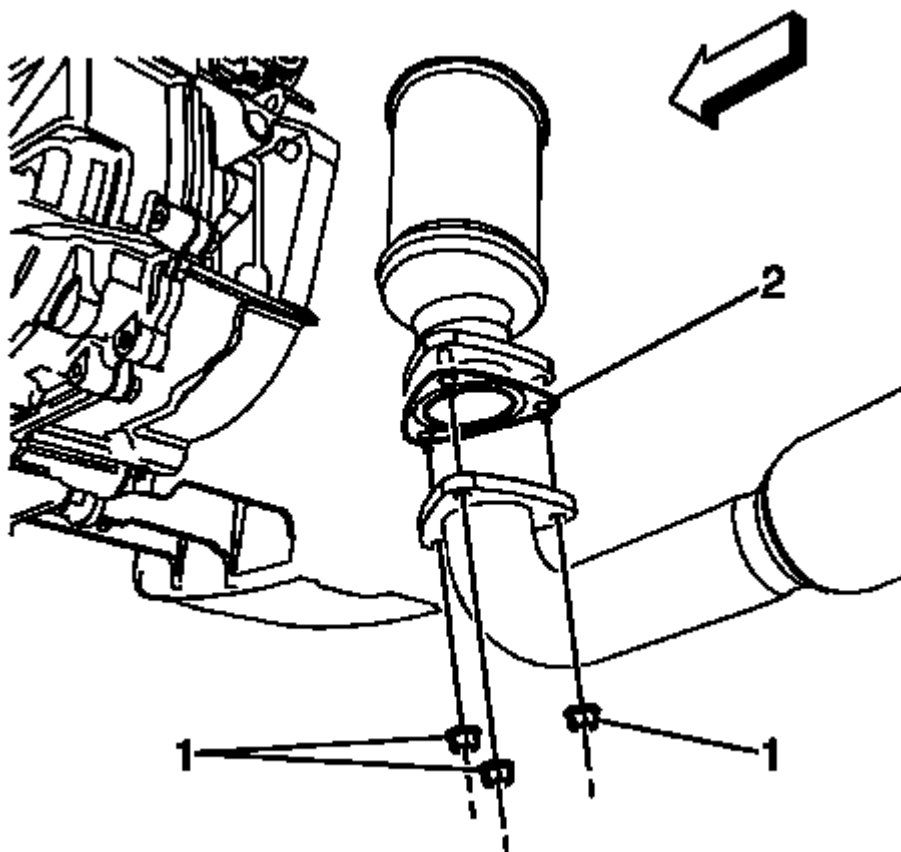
Lower Catalytic Converter, Nuts And Gasket
